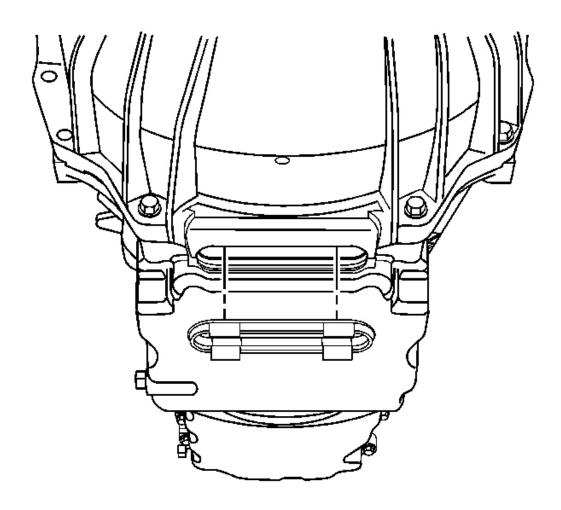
View Of Service Slot Plug Courtesy of GENERAL MOTORS CORP.
